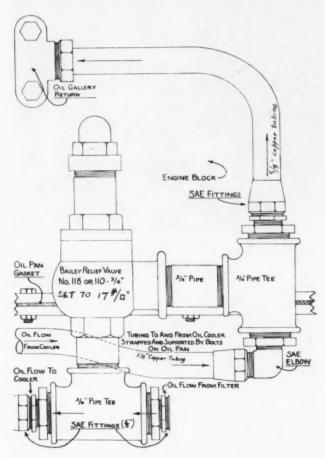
Pipe fitting necessary to install oil cooler with bypass on 6-cyl diesel engine
